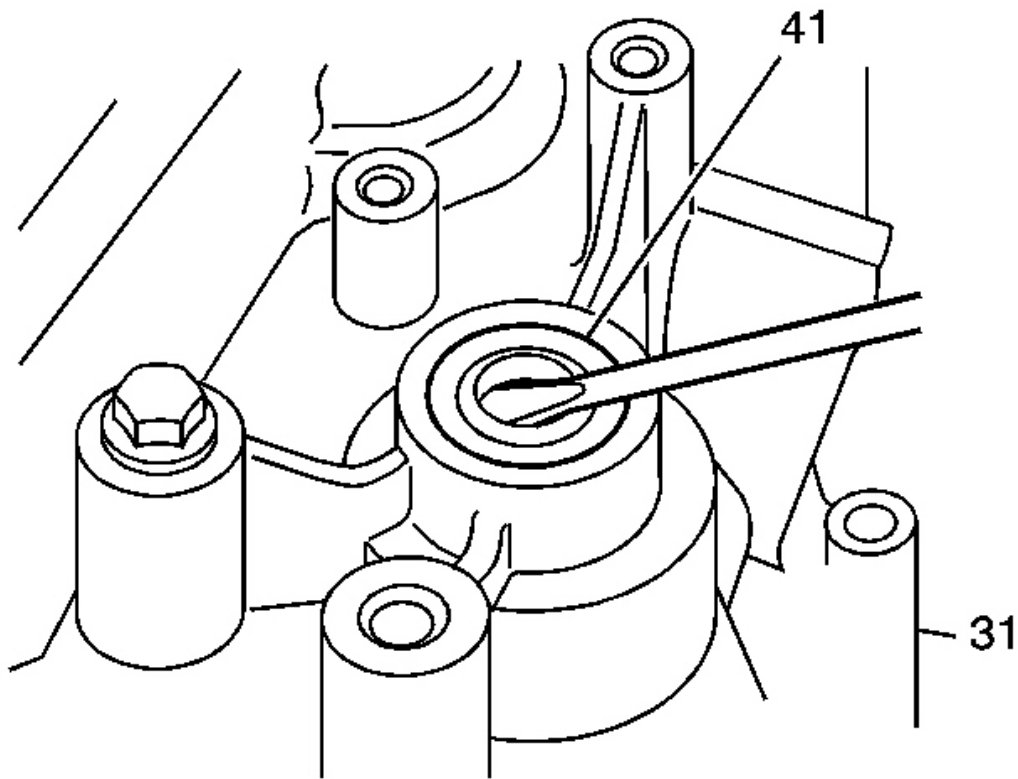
Removing Manual Shift Shaft Seal Using A Small Prybar
